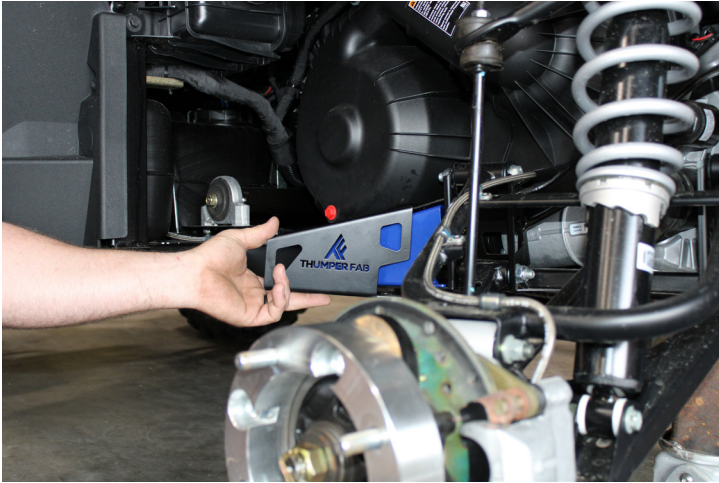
Use Ratchet & 15mm Socket or Wrench to Fasten Outer Chassis Brace (1) to Inner Chassis Brace (3) through Frame
